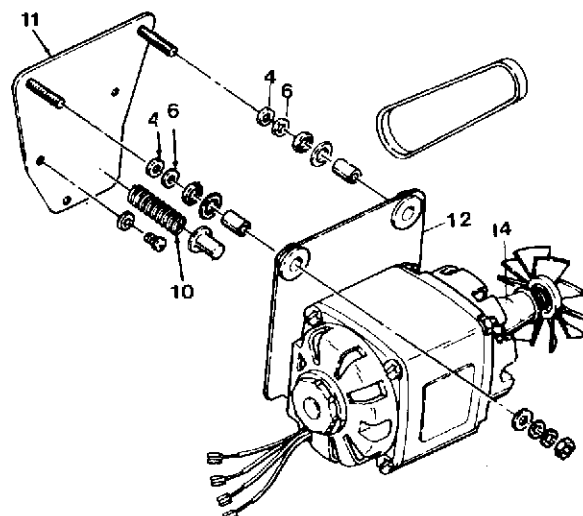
1030N MOTOR MOUNT ADJUSTMENTS
